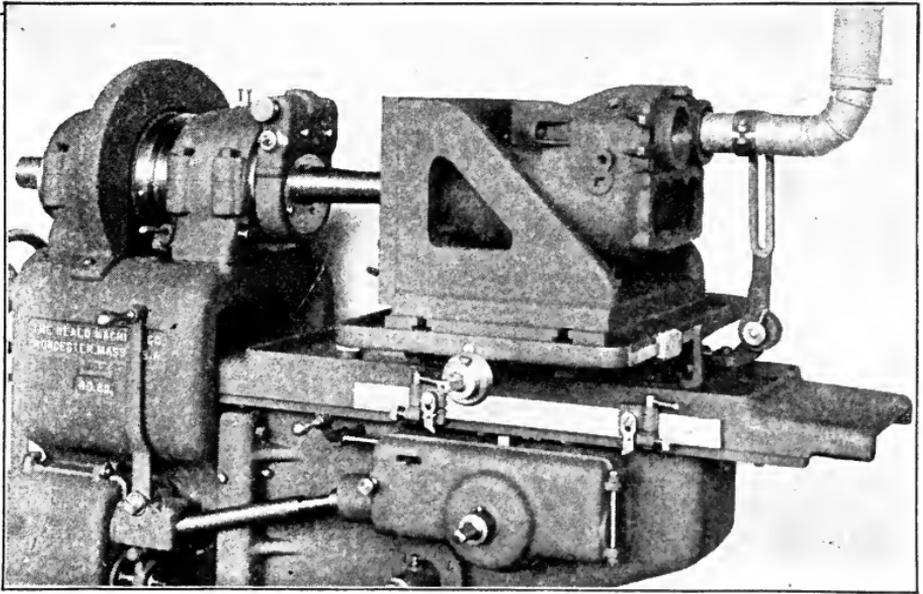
Grinding Gas Engine Cylinders. View Shows Exhaust for Dust, Jig for Holding Cylinders, and Eccentric Wheel Spindle
